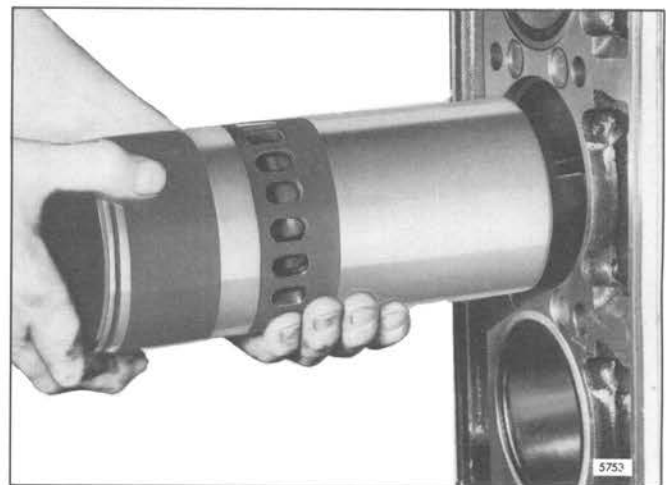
Installing Piston, Connecting Rod and Liner Assembly in Cylinder Block
